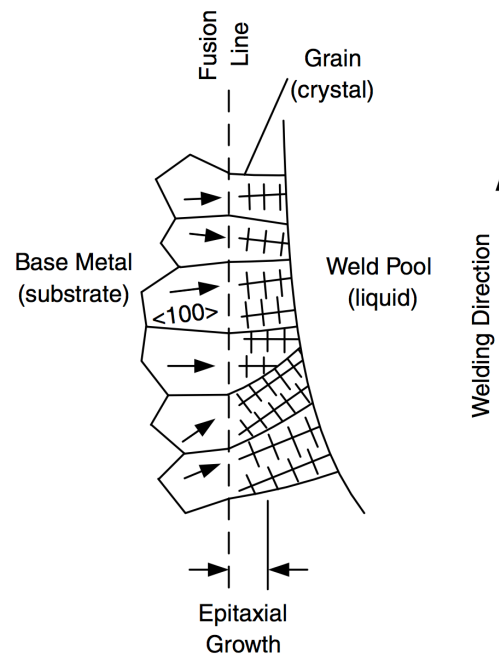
Epitaxial growth fusion weld [57]
